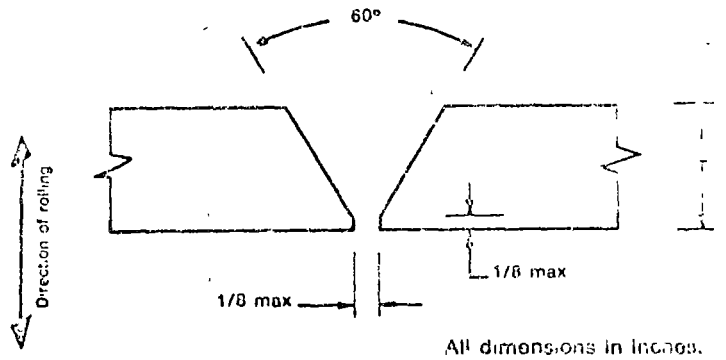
Test plate for limited thickness—all positions—welder qualification.
